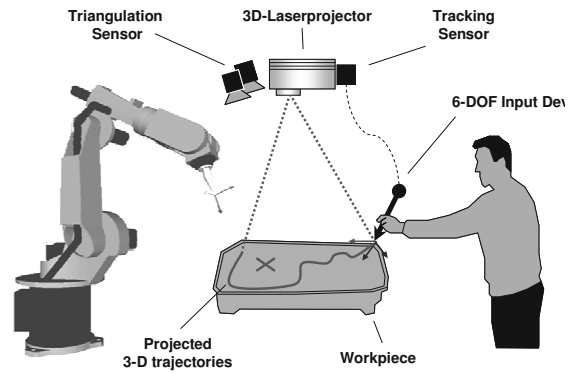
Interactive laser-projection for programming a processing task on a workpiece surface
